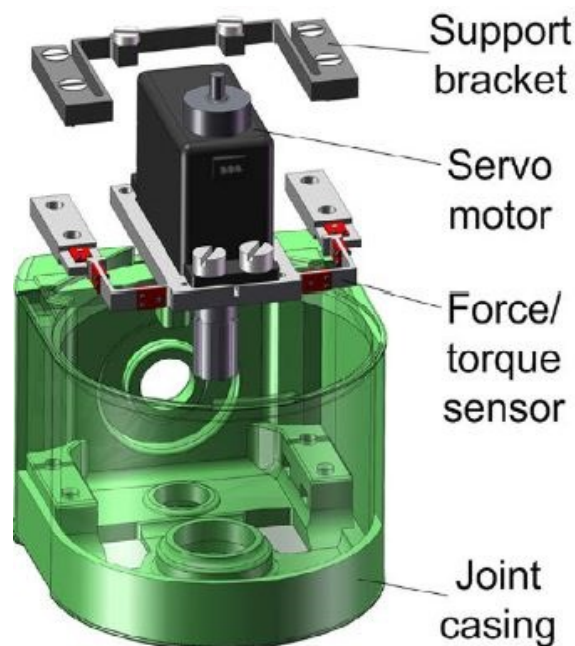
Force/ Torque sensor layout for MAMBA. Assembly style could inspire spring fitting for servo motor [61].
